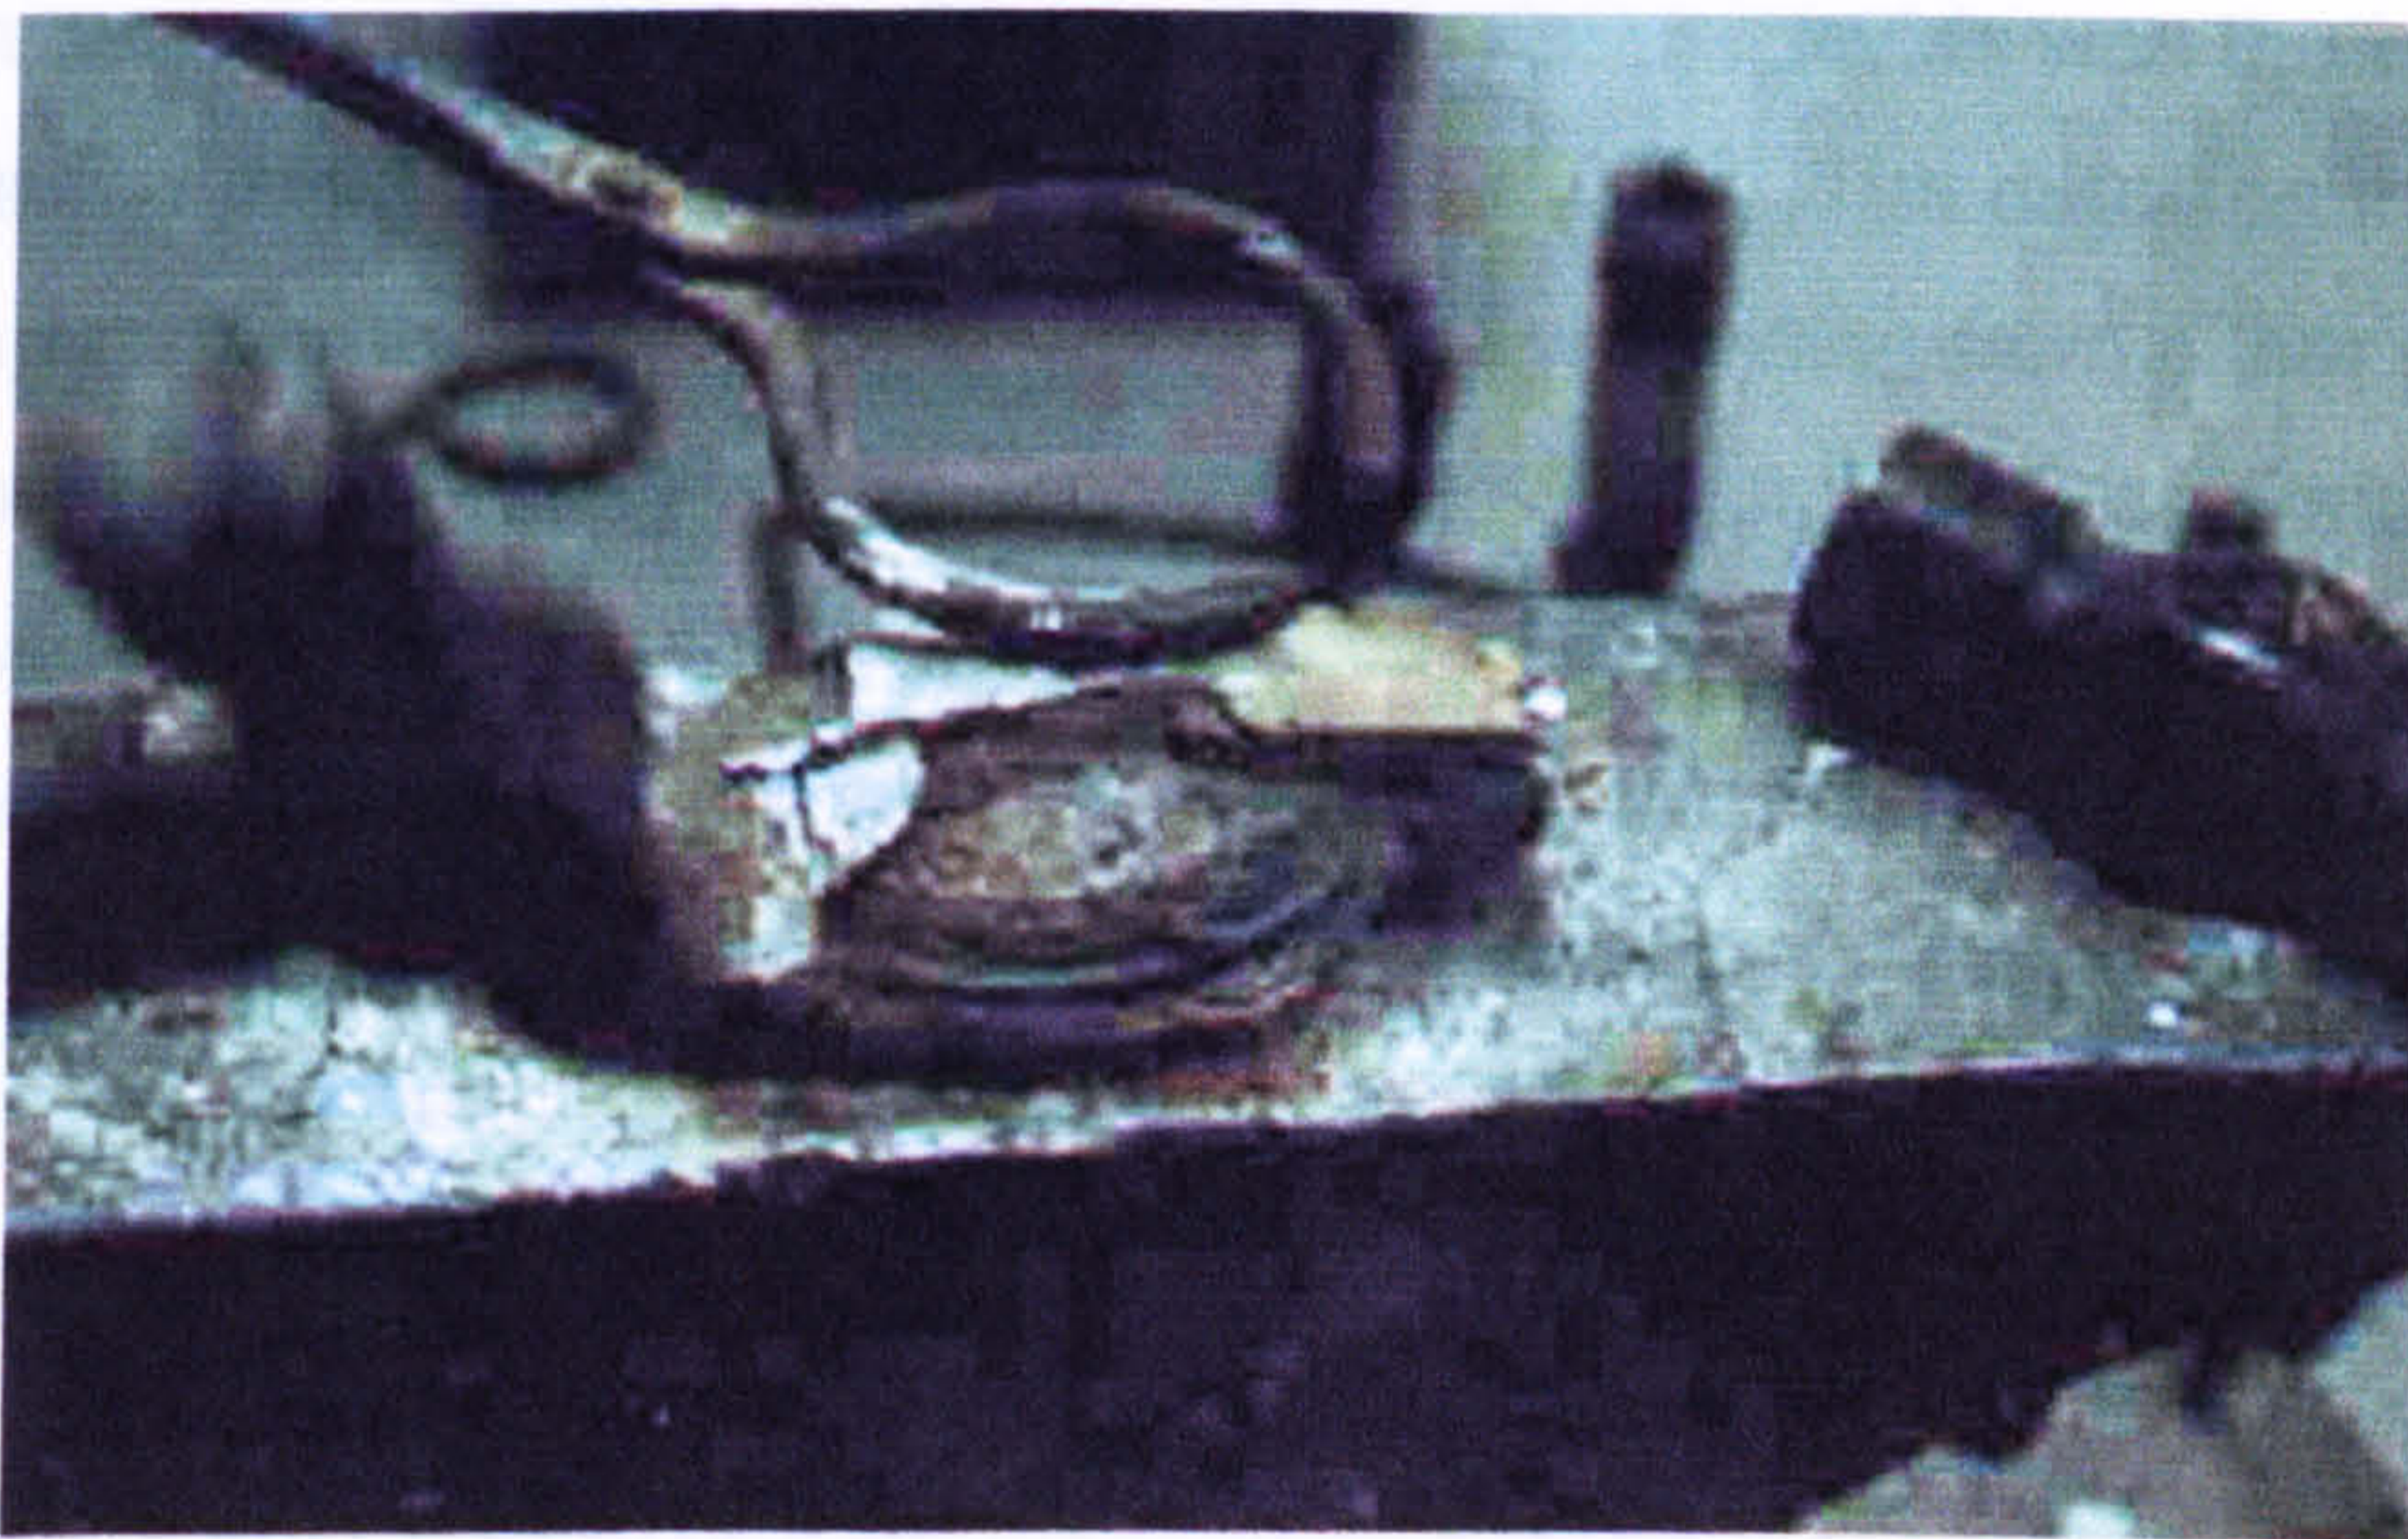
Breaking the clay mould after casting. (Photo: M. Hayeur Smith).
